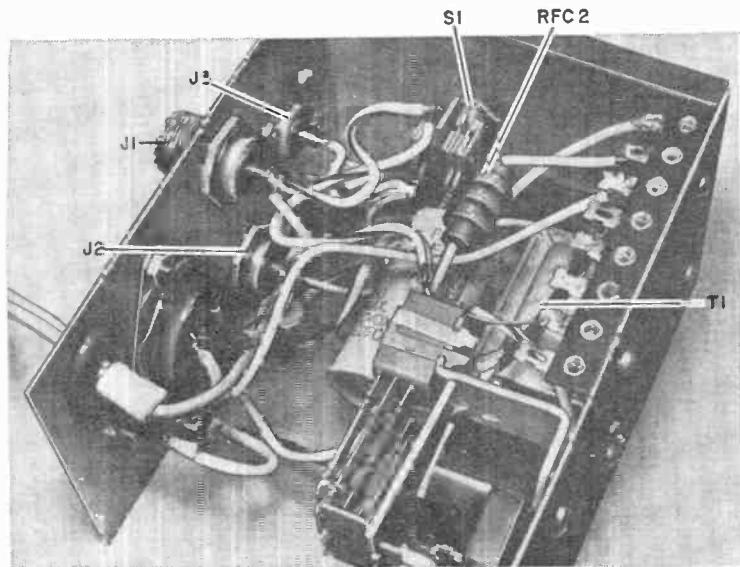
Component mounting is best accomplished if ends of chassis are bent slightly outward during machining and chassis wiring.
